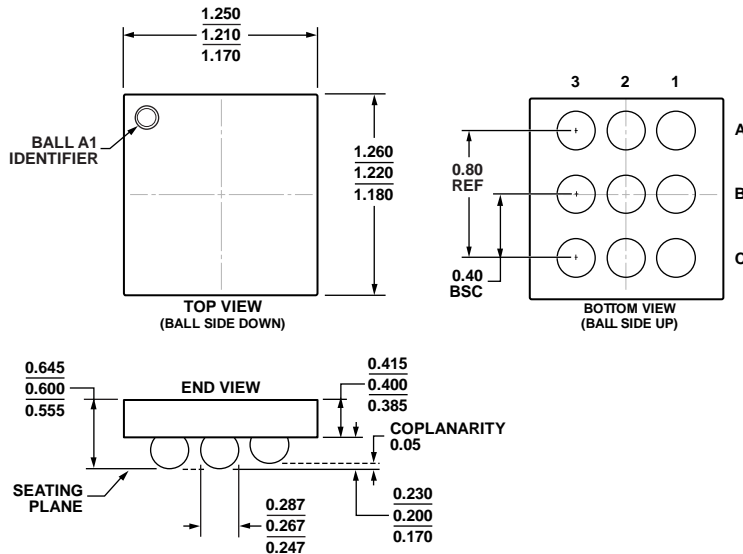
9-Ball Wafer Level Chip Scale Package [WLCSF]
